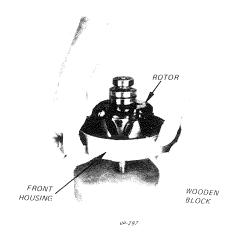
SEPARATE FRONT HOUSING FROM ROTOR
